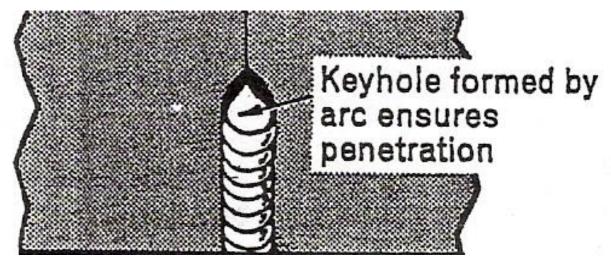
Close-up of Welding of a Butt Joint
